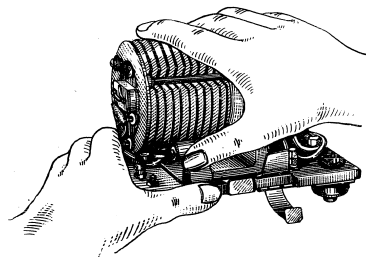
Engaging Terminal Block Locks by Regulator Plate Uprights
